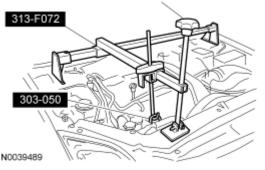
Lifting Engine Using Special Tool (303-050, 313-F072) Courtesy of FORD MOTOR CO.
